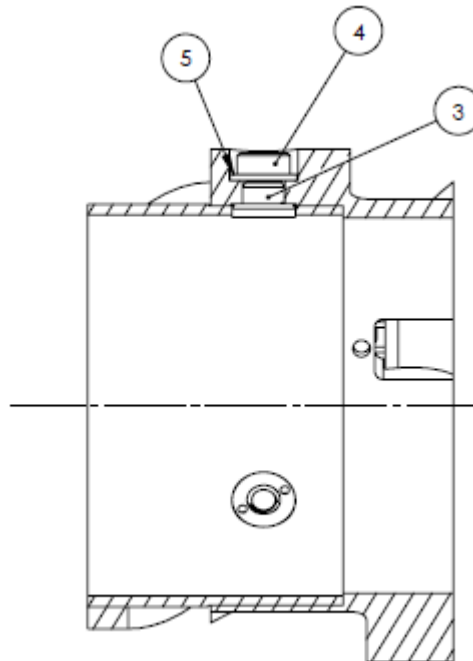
Section view of the cutter head showing one of the three head mounting screws. (3) Head Mounting Bushing, (4) M6 low head socket head cap screw, (5) Washer.
